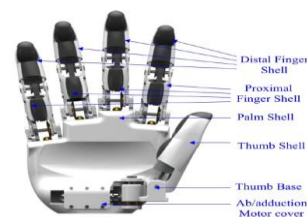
Five Finger Hand With Under Actuated Mechanism Labeled Drawing [31]
